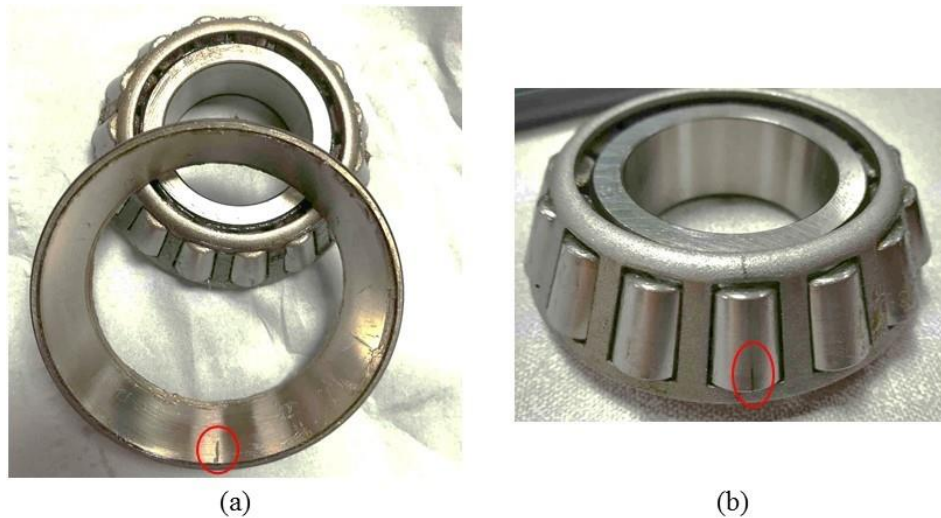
Tapered roller bearings with seeded defects
